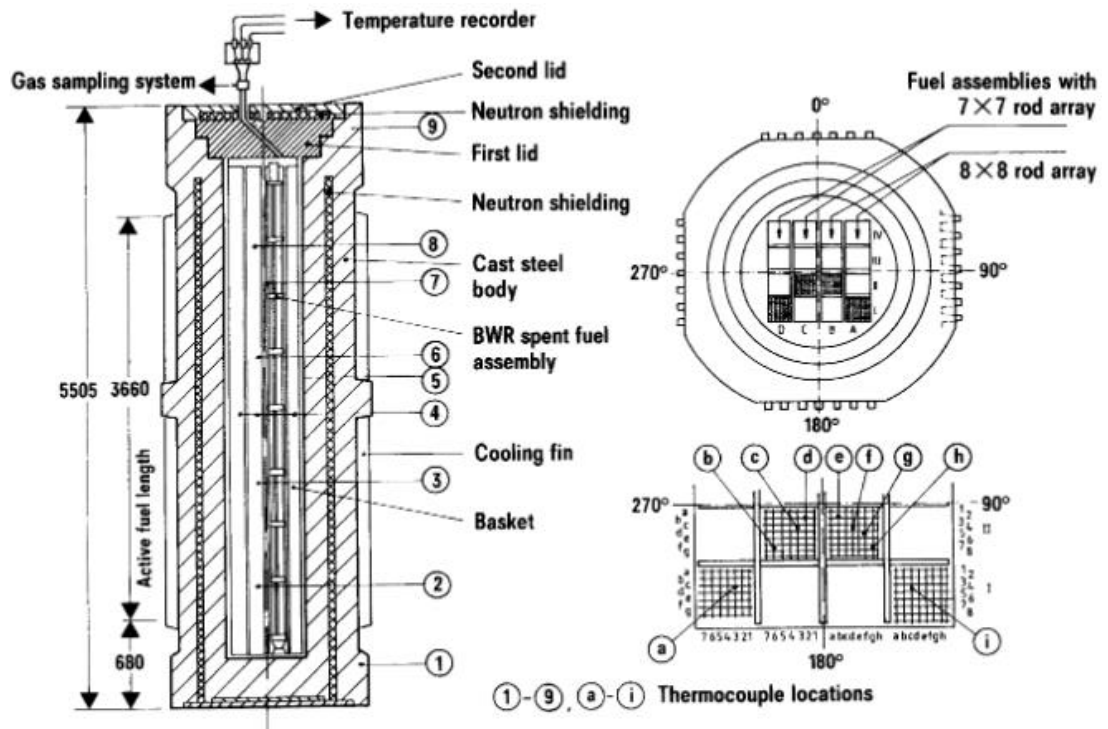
Schematic of BWR used fuel assembly thermocouple positions [7]
